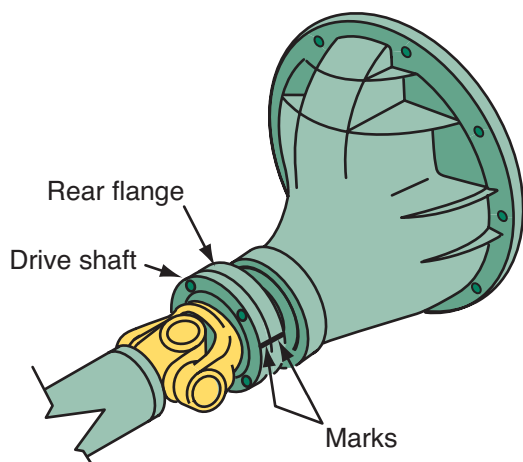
To ensure proper balance and phasing of the drive shaft, make alignment marks on the rear flange and the rear yoke.
